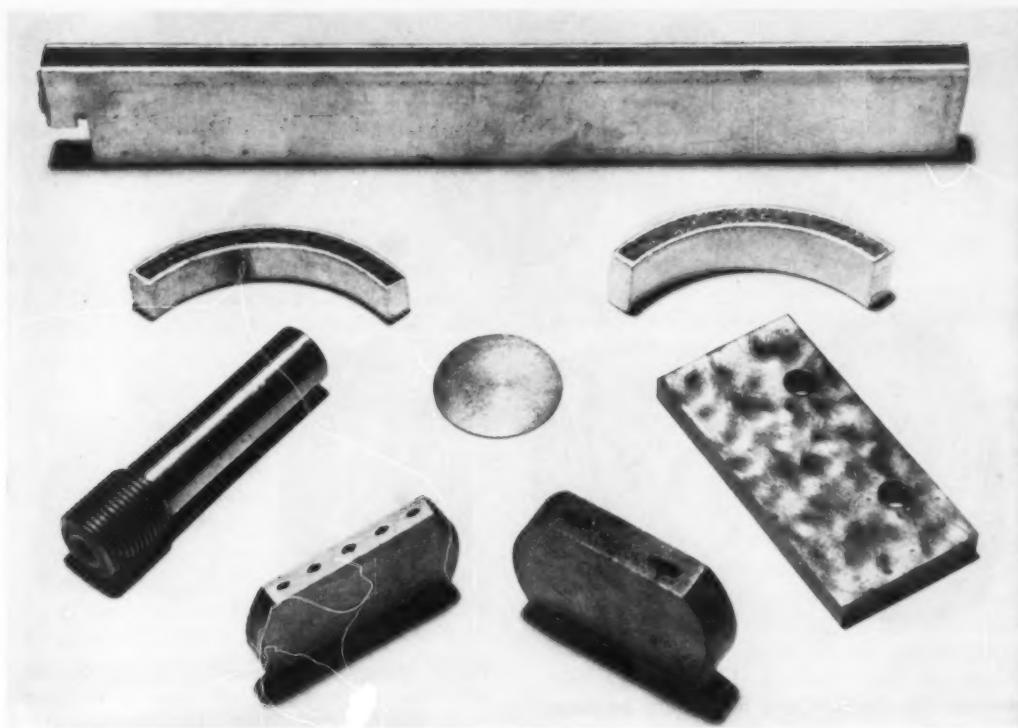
Some Components Made by Hot Pressing Powders. At the top are straight and curved strips of "boral" plate, a sandwich of aluminum sheets with a boron carbide-aluminum filler. It is used for a neutron shielding material
